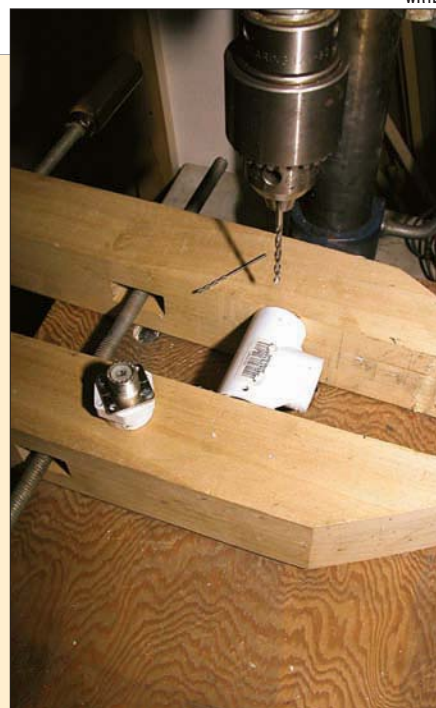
Photo A — The $\frac{3}{4}$ inch PVC T is clamped in a woodworker's clamp, ready to drill the screw-body holes with a $\frac{5}{64}$ inch drill bit. I had first drilled $\frac{5}{64}$ inch pilot holes with the adapters and bottom plug installed in the T. Try to center the hole on the side of the T, and drill all the way through both sides. Then remove the adapters and plug, and drill the screw-body holes in the T.
